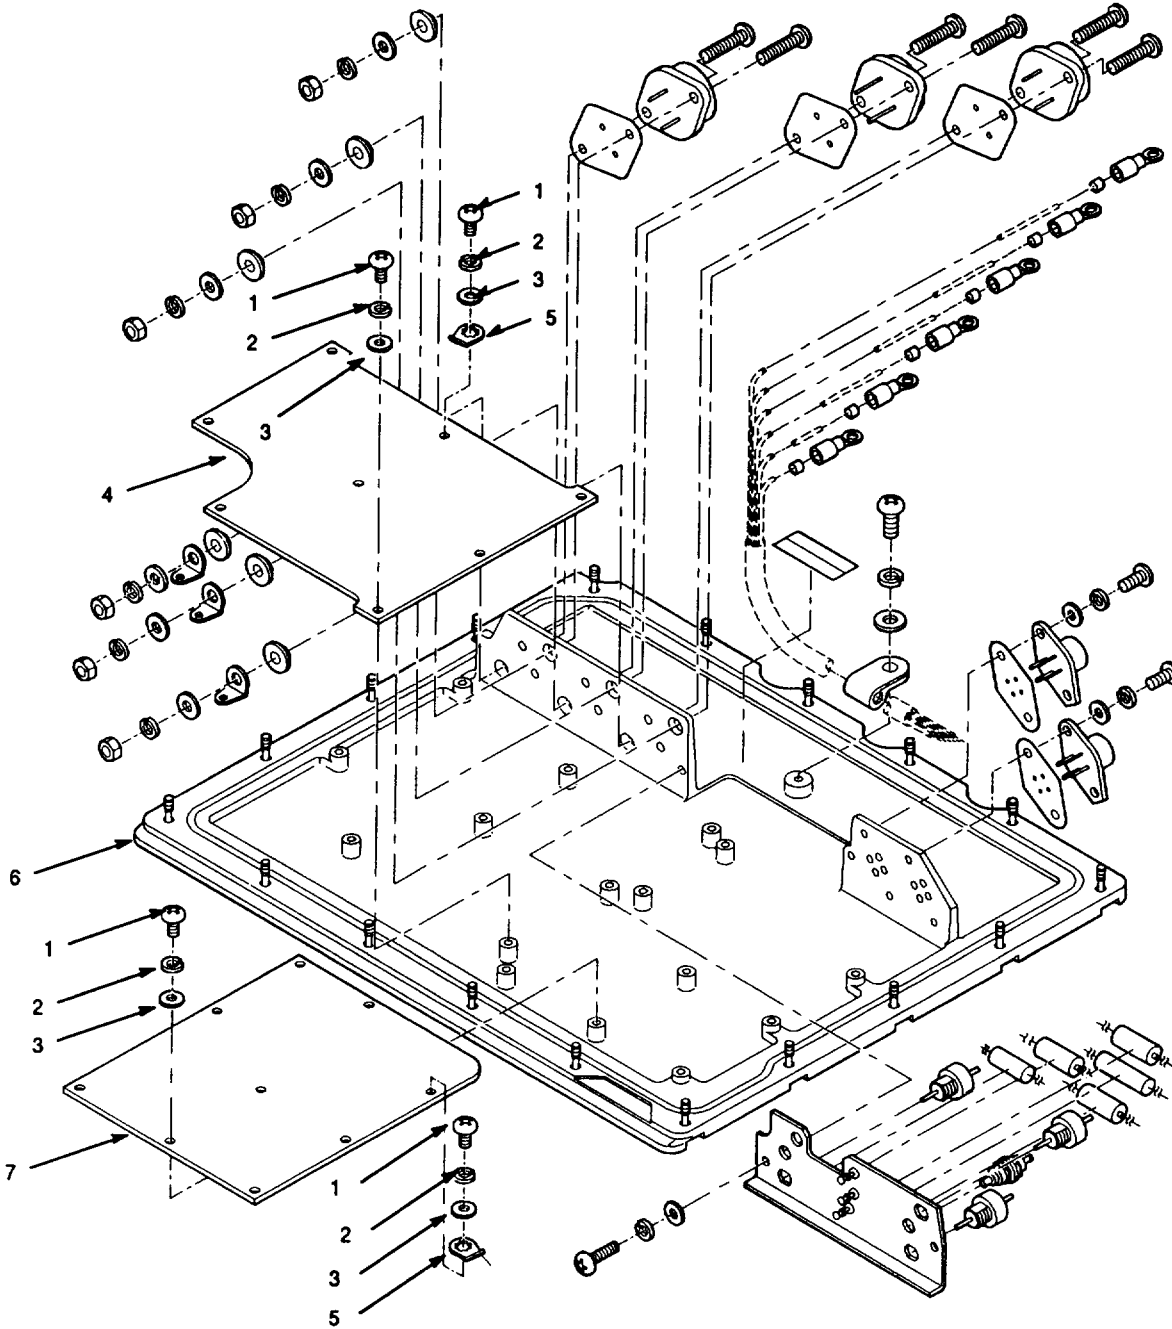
Disassembly of Single Radio Mount Power Supply
